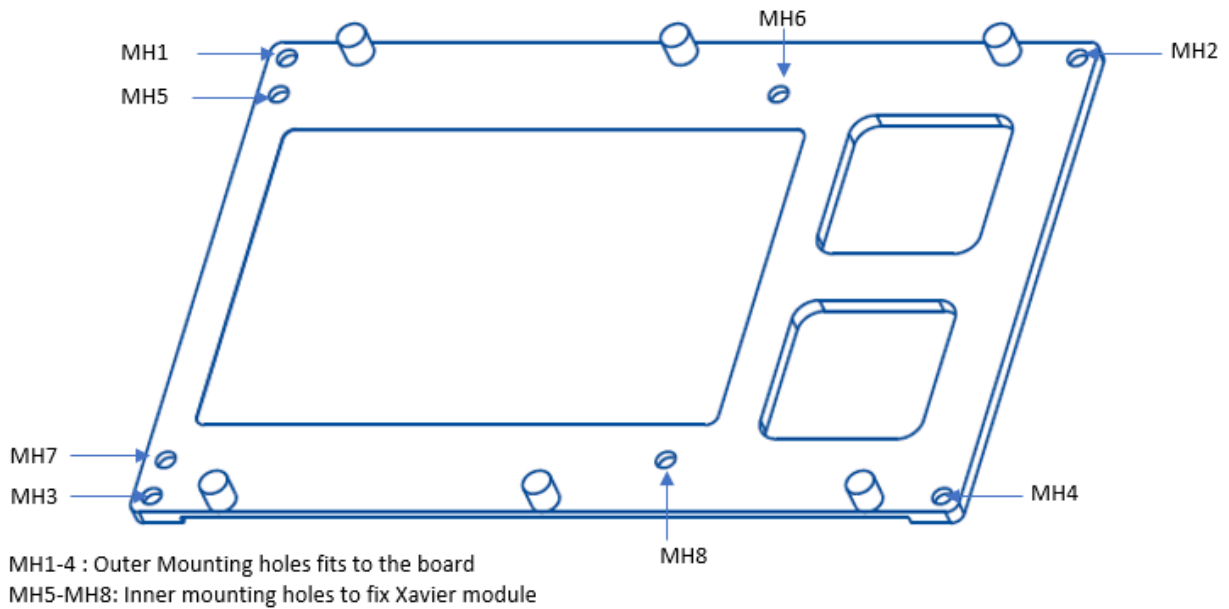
Schematic Top View Section with Mounting Hole Specifications
